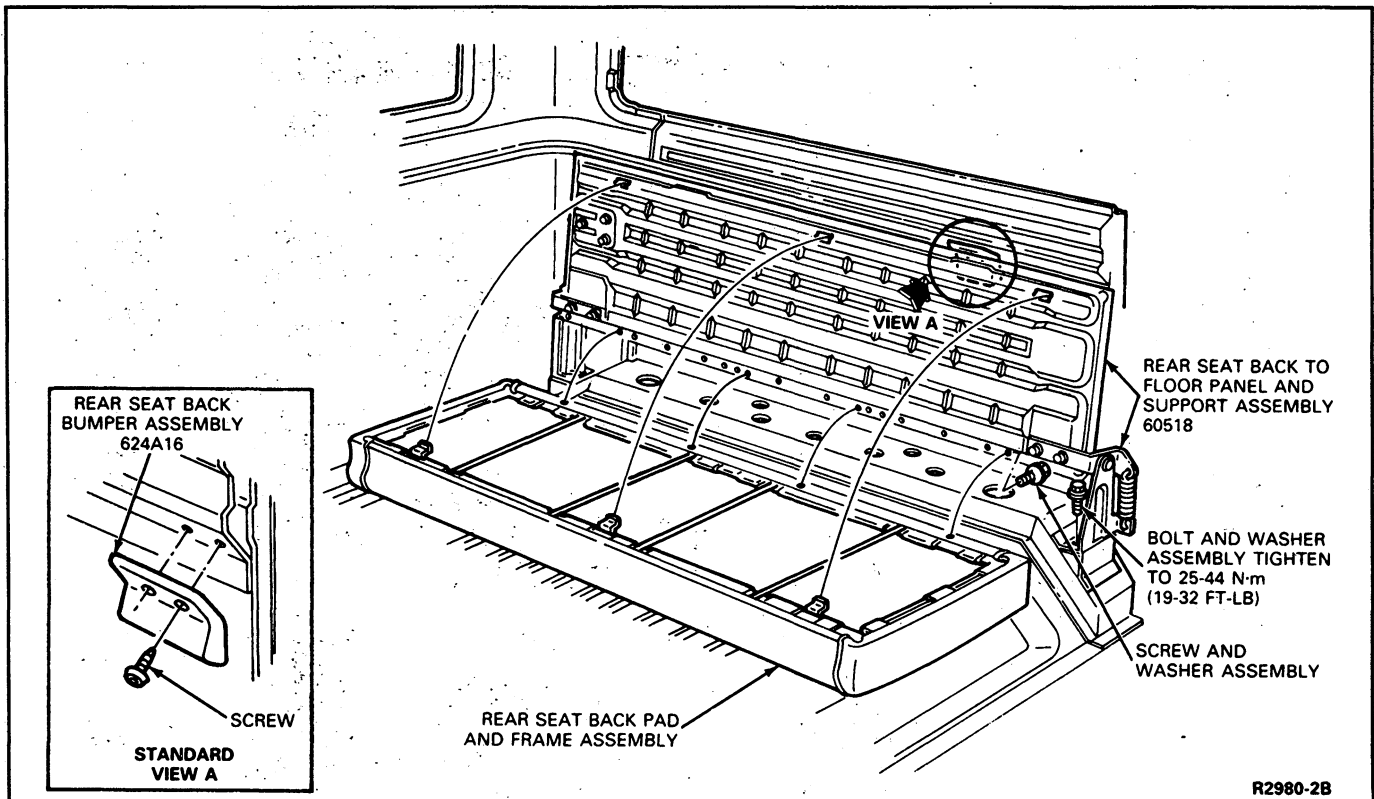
Forward-Facing Rear Seat Back Installation—F-150—F-350 Super Cab
